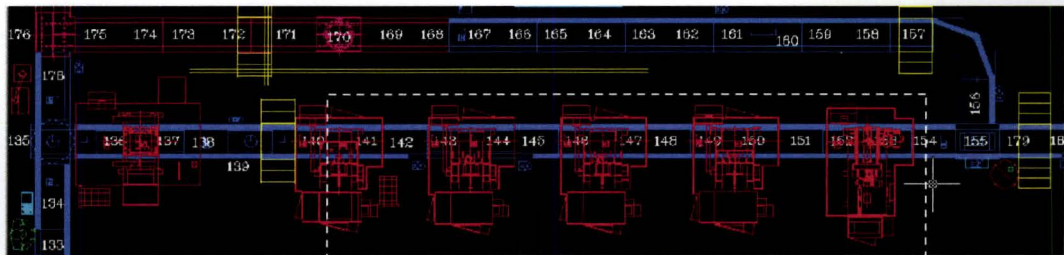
A - Section of the Engine Assembly Line with the Four Torque Machines for the Connecting Rods. Station 155 Divert Quality Failures to Re-work Station 170
